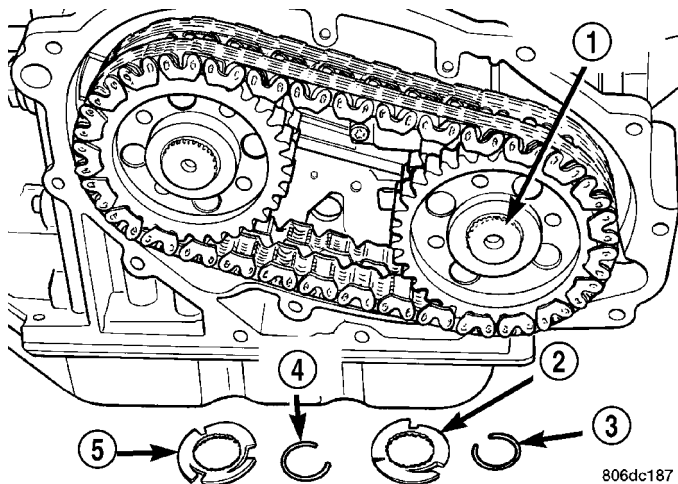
Remove Transfer Shaft Sprocket Snap Ring and Wave Washer
